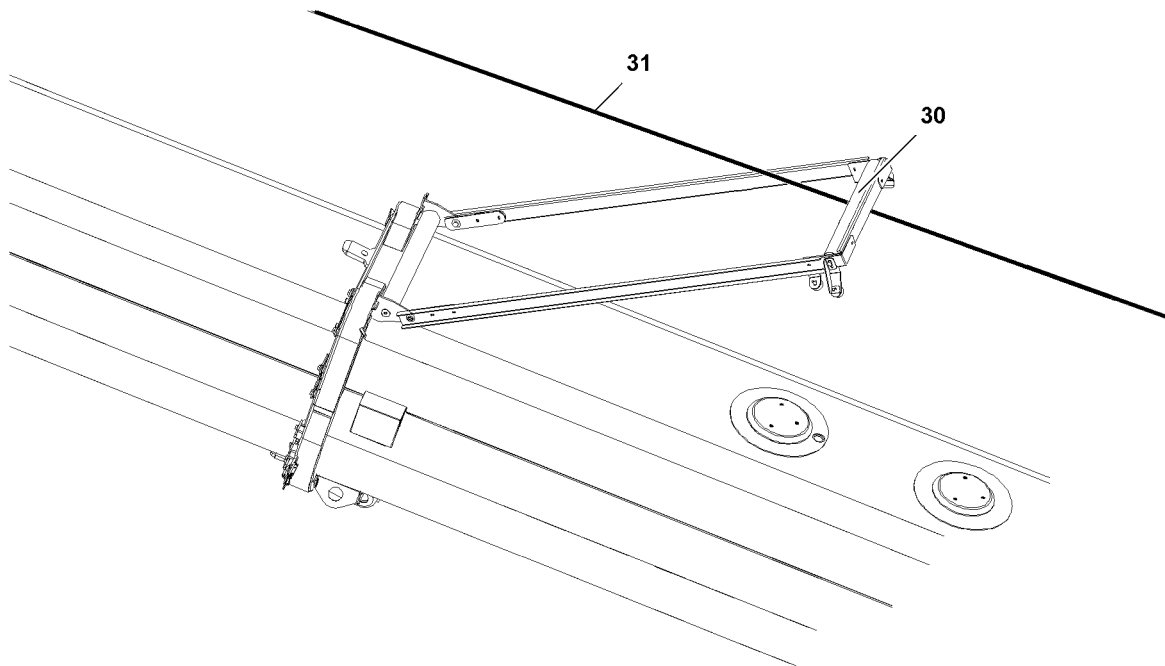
Hoist rope routing under the hoist rope lug 30
